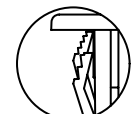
HOLE PLUG (No wing serrations for ease of removal)
